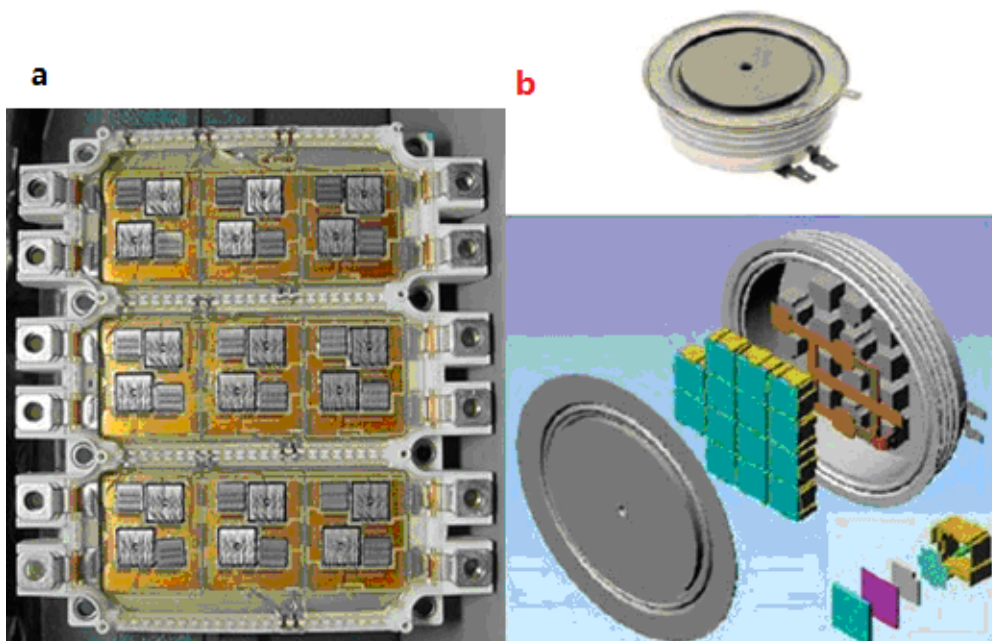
Bond Package IGBT (a) and Press-pack IGBT (b) (Internet)
